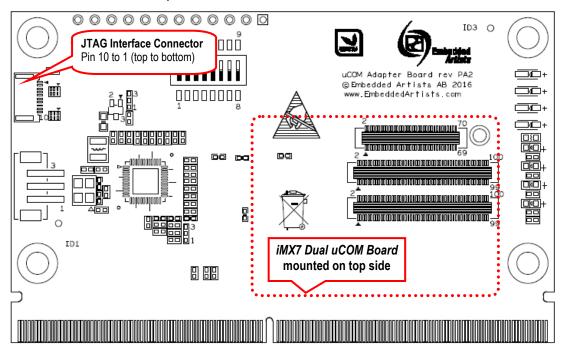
uCOM Adapter Board, Location of JTAG Interface Connector
